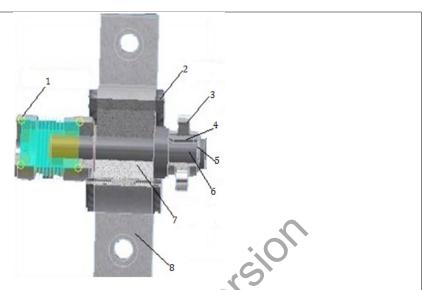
1/4 section plan of the main shaft. 1-Elastic coupling, 2-Flange I, 3-Stainles (See) main sprocket, 4-Keyway; 5-baffle I, 6-Spindle, 7-Sliding bearing I, 8-Sliding bearing seat I.
